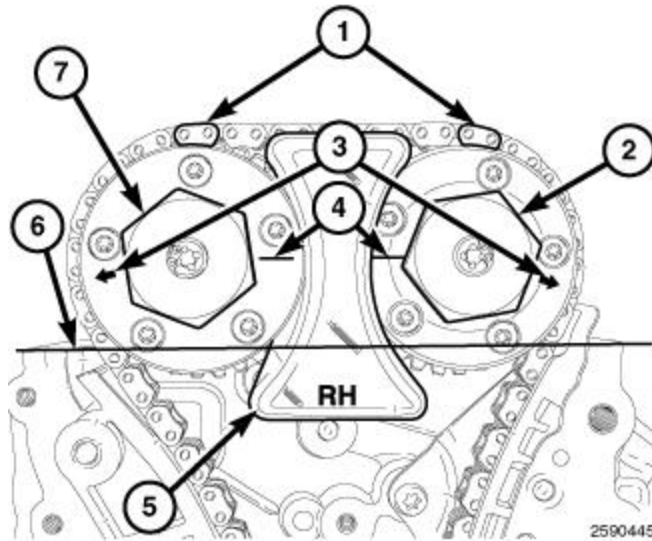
Phaser Timing Marks, Oil Control Valves & RH Camshaft Phaser Lock
